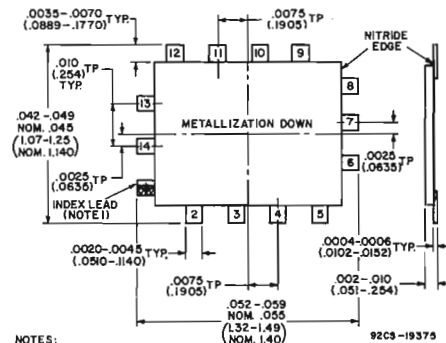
Terminal layout for CA3054L (14-lead configuration)
